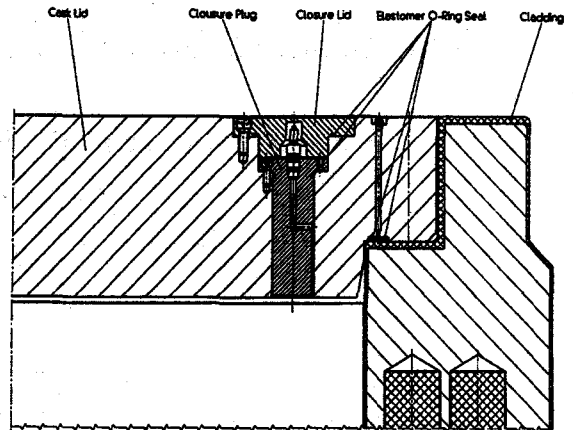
Enlarged cask lid assembly of the KN-12 cask
